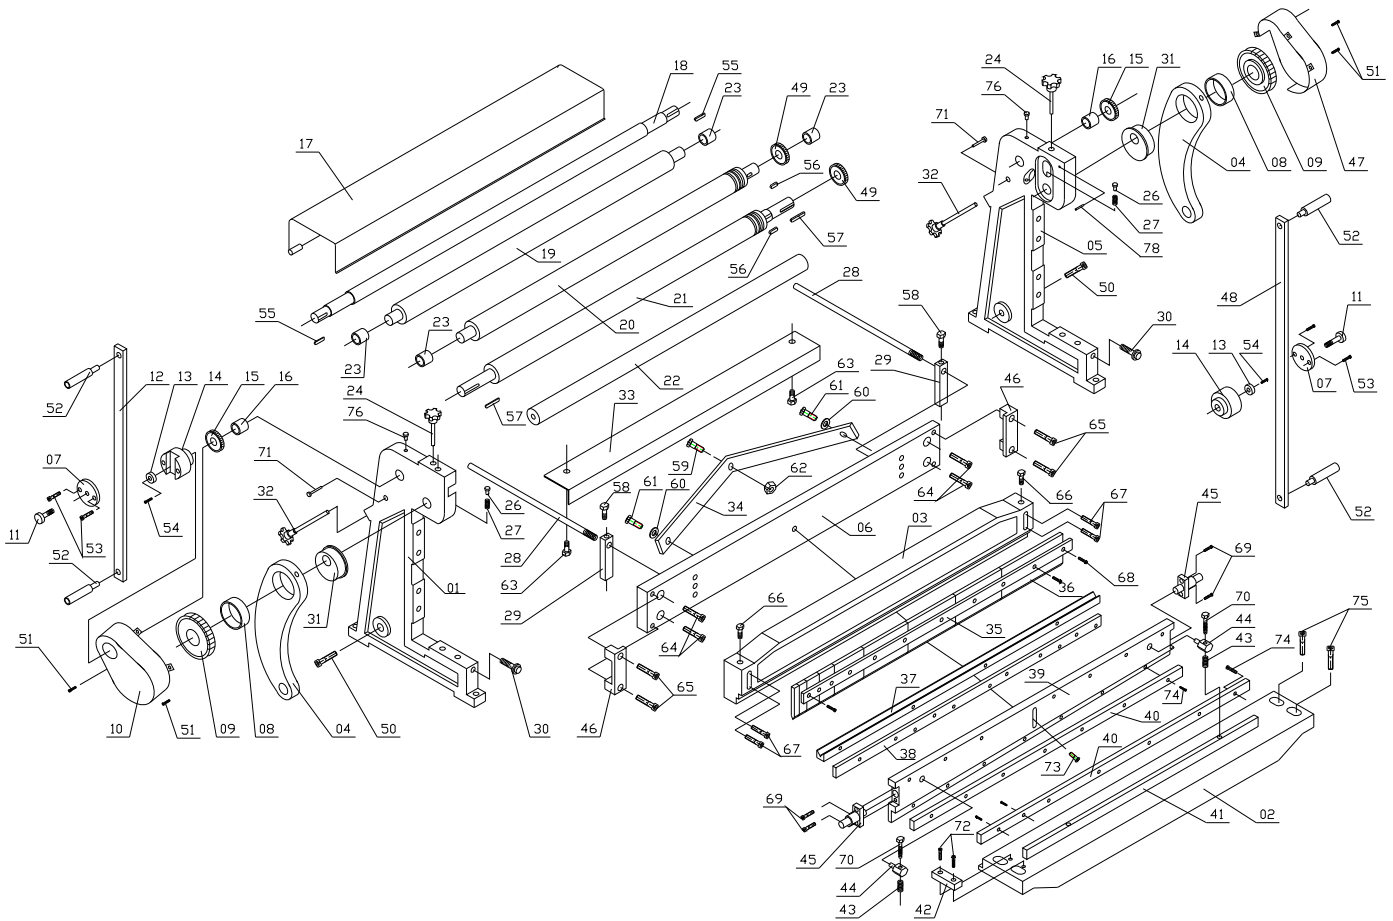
Repair Parts Illustration for Shear, Brake and Roll
